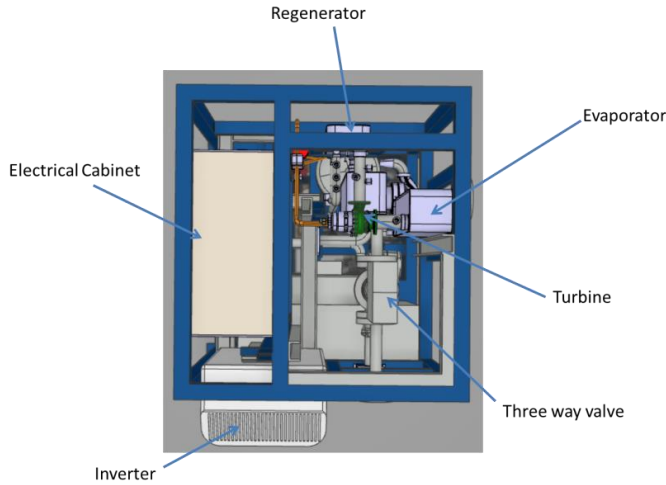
3-D CAD design of the ORC unit assembly: view from the top
